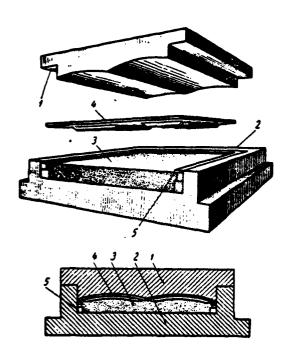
The diagram of die/stamp with die, filled with shot: 1 - die/stamp; 2 - matrix/die; 3 - fraction; 4 - the part to be stamped; 5 - ring with the friendly.
